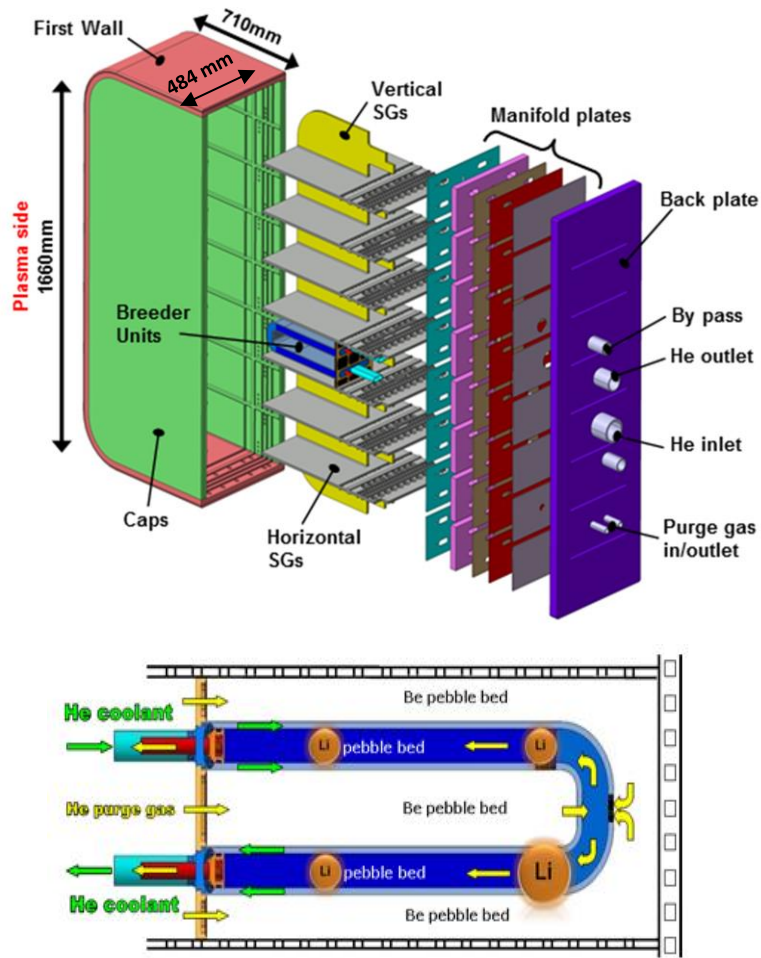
a - Exploded view of the Helium Cooled Pebble Bed – HCPB test blanket module, the purge gas and the coolant flow inside the breeder unit, SG – stiffening grids (Source: [7])
